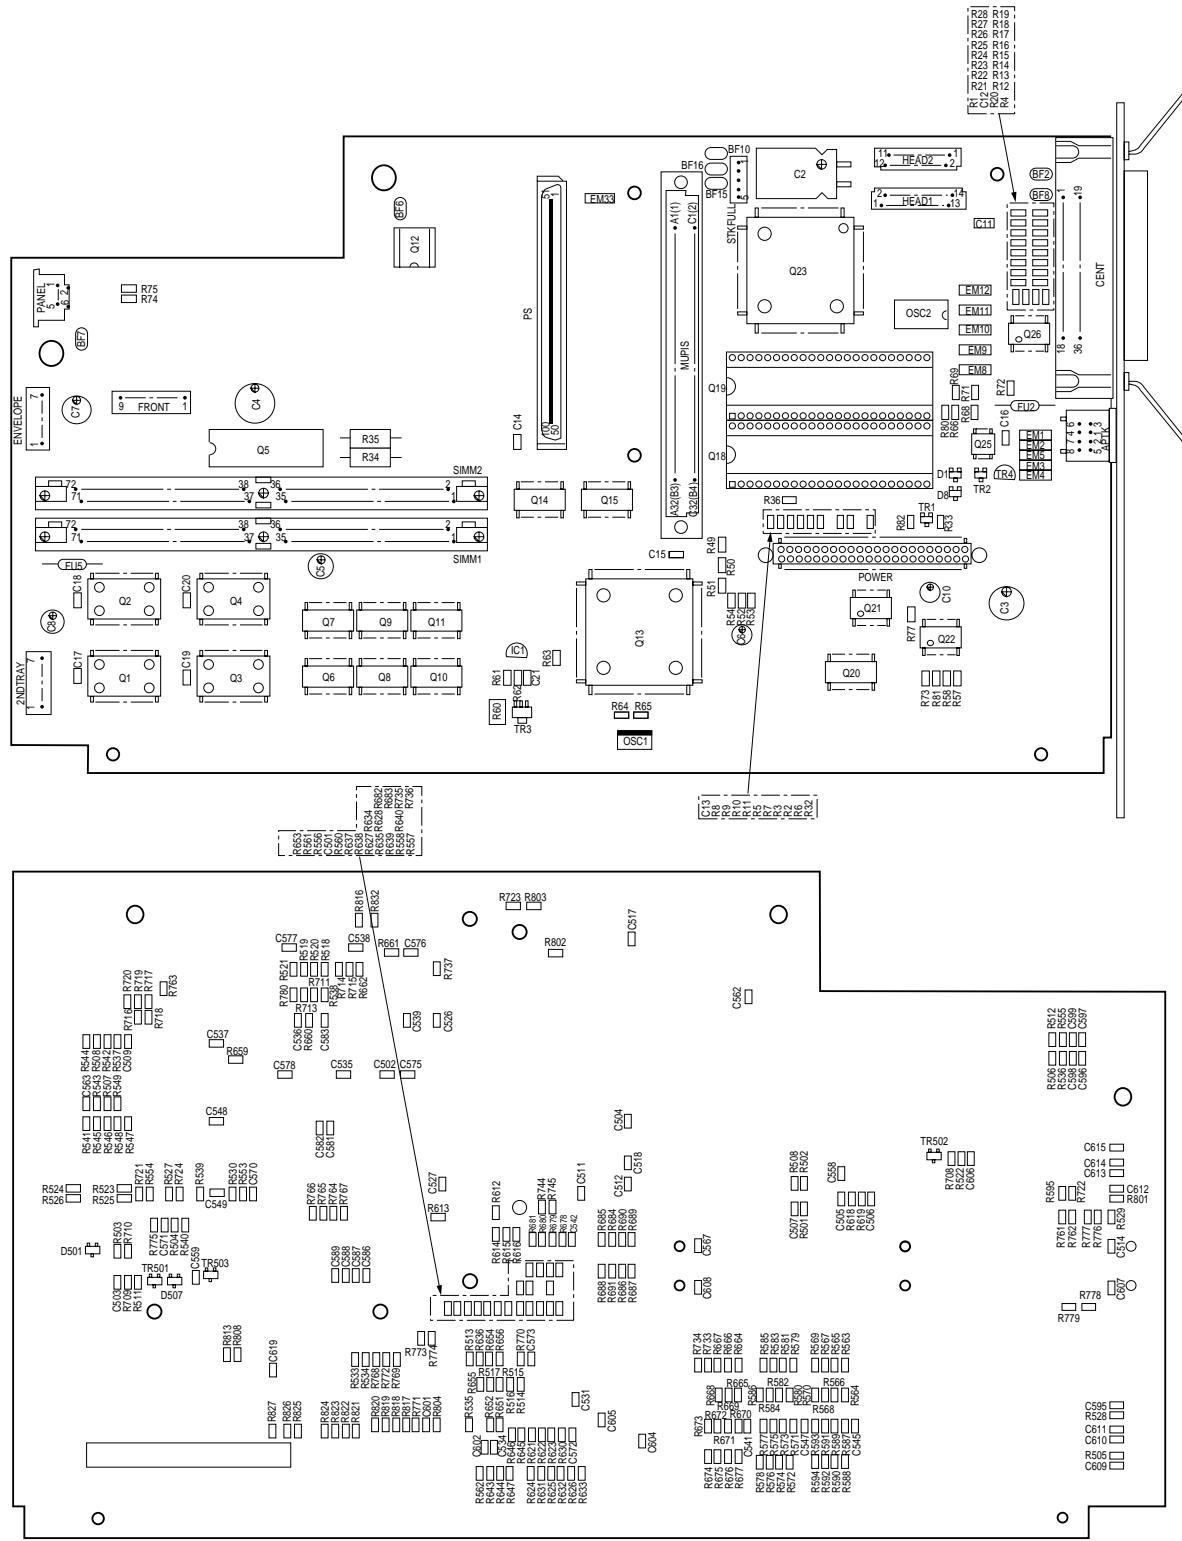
1	Main Controller PCB (COM-1/18)	(Rev. 4)
